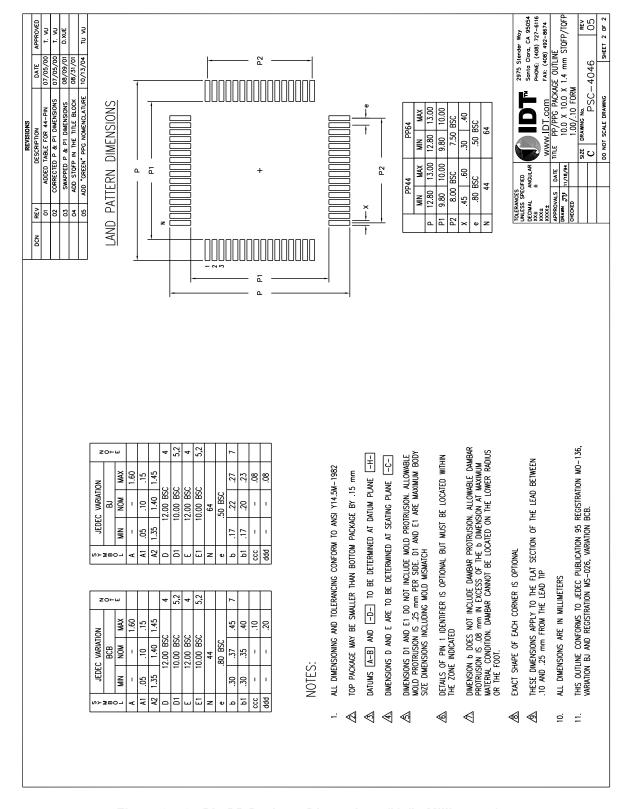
64-Pin PP Package Dimensions (b) (in Millimeters)
